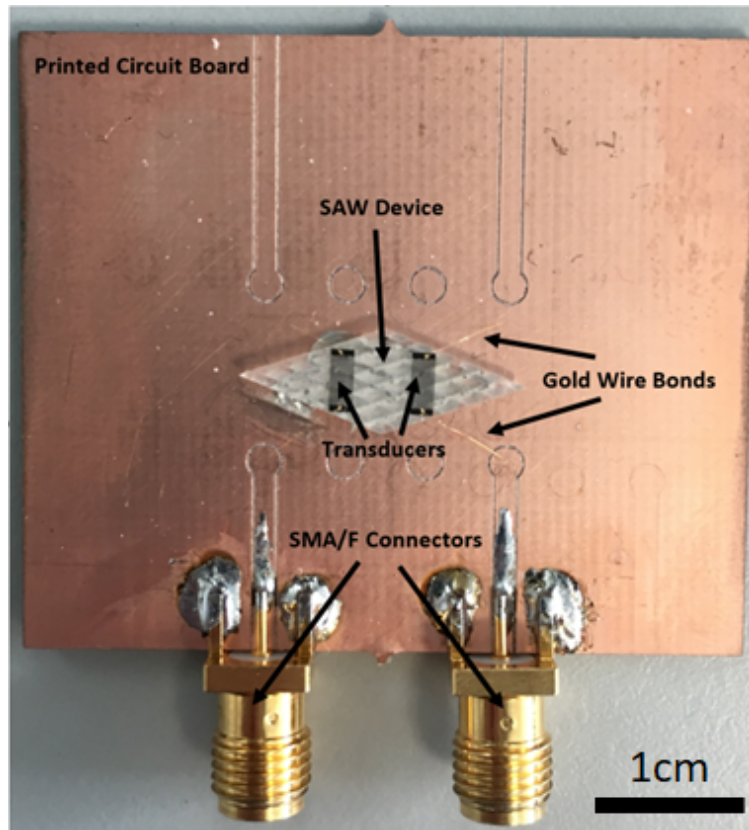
A photo of the SAW device mounted on and bonded to the copper PCB with gold bonding wires and SMA connectors.
